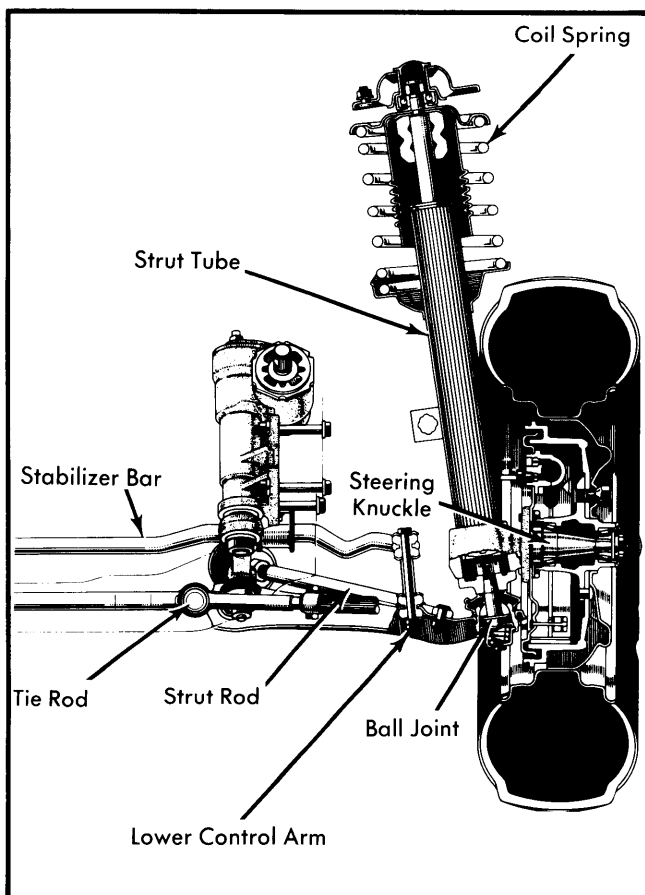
Assembled View of Front Suspension Assembly (Corolla Shown; Other Models Similar)
